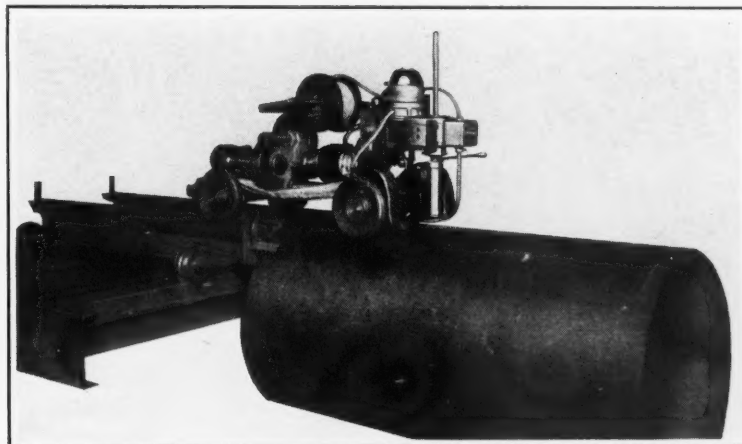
A Small Power-Driven Tractor Carrying the Welding Head Rolls along the Top of the Pipe to Weld the Outside Seam
